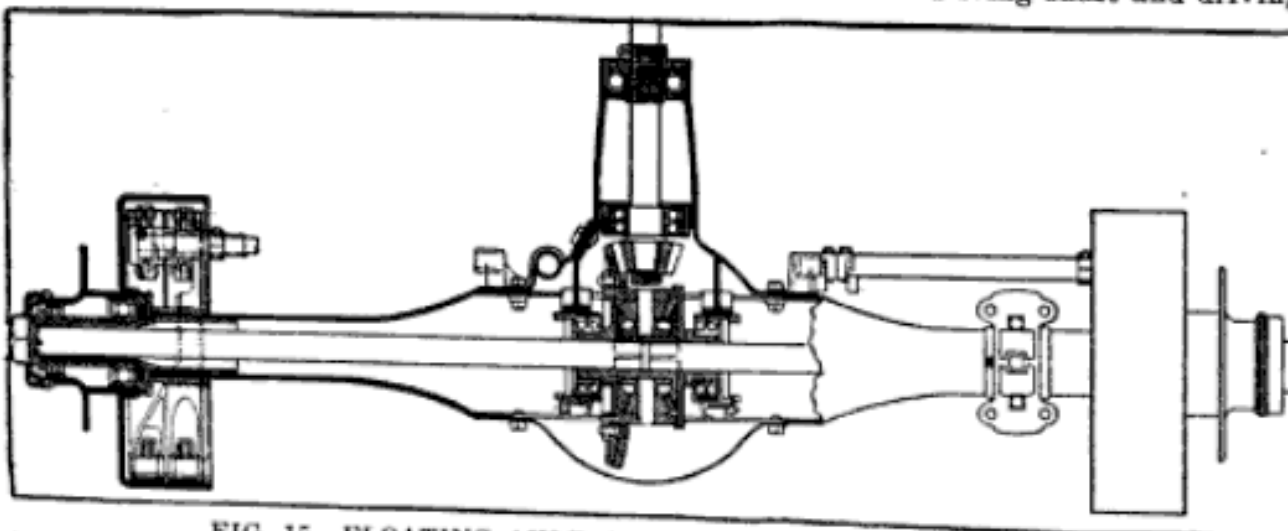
FLOATING AXLE OF HESS SPRING AND AXLE CO.
